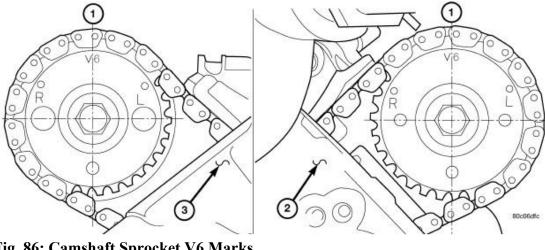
Camshaft Sprocket V6 Marks Courtesy of CHRYSLER LLC
